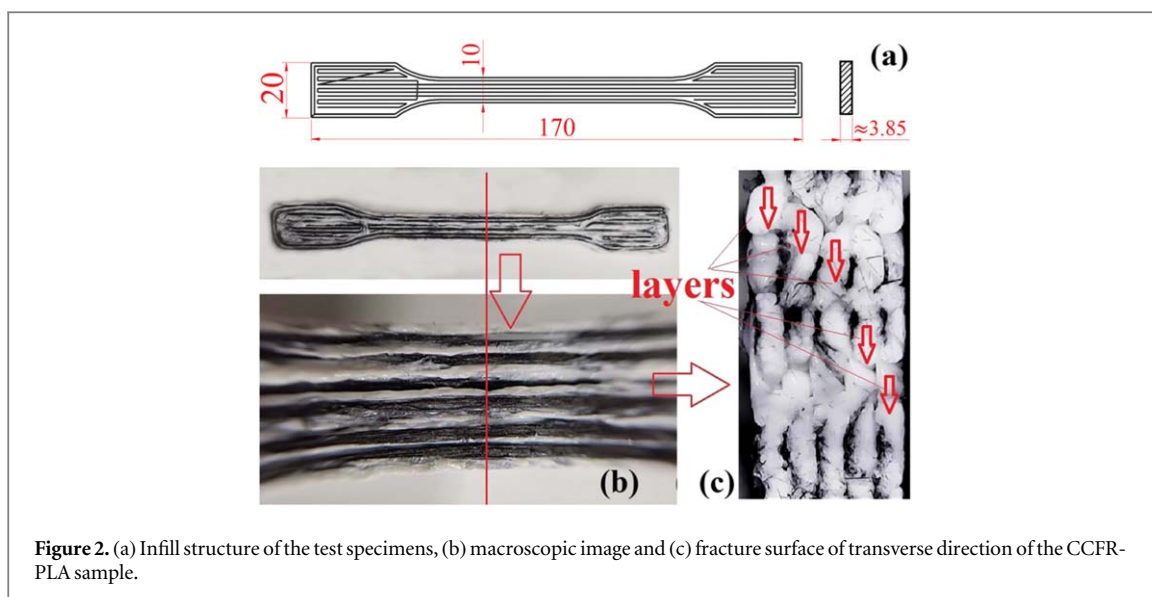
(a) Infill structure of the test specimens, (b) macroscopic image and (c) fracture surface of transverse direction of the CCFR-PLA sample.
